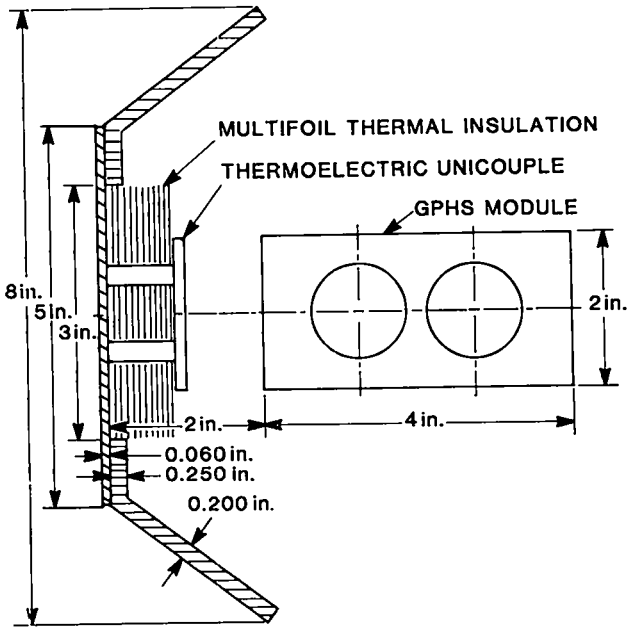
The C-shaped housing simulant with GE segment in place (dimensions approximate).
